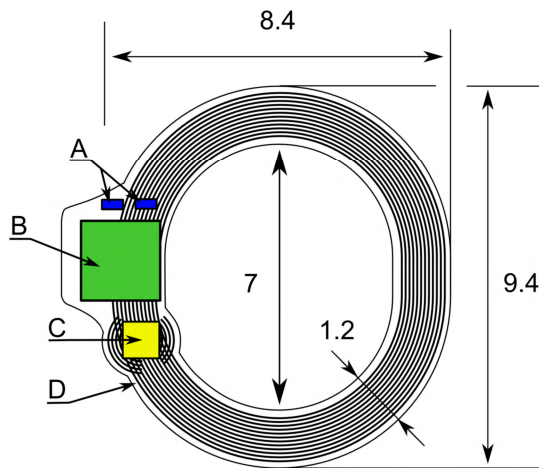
In scale drawing with typical dimensions and layout of the implantable device. (A) Capacitances (B) Off-the-shelf telemetry IC provided by Melexis – 2.47x2.57 mm, (C) pressure sensor 1x1 mm, (D) The substrate, flexible printed circuit. All the dimensions are expressed in mm.
